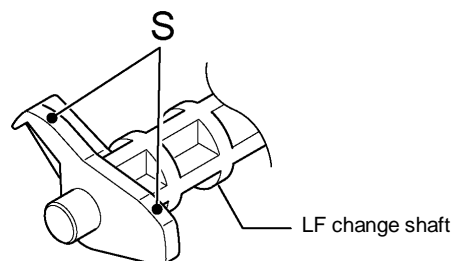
Gear Holder Change Cam Surface on LF Change Shaft
